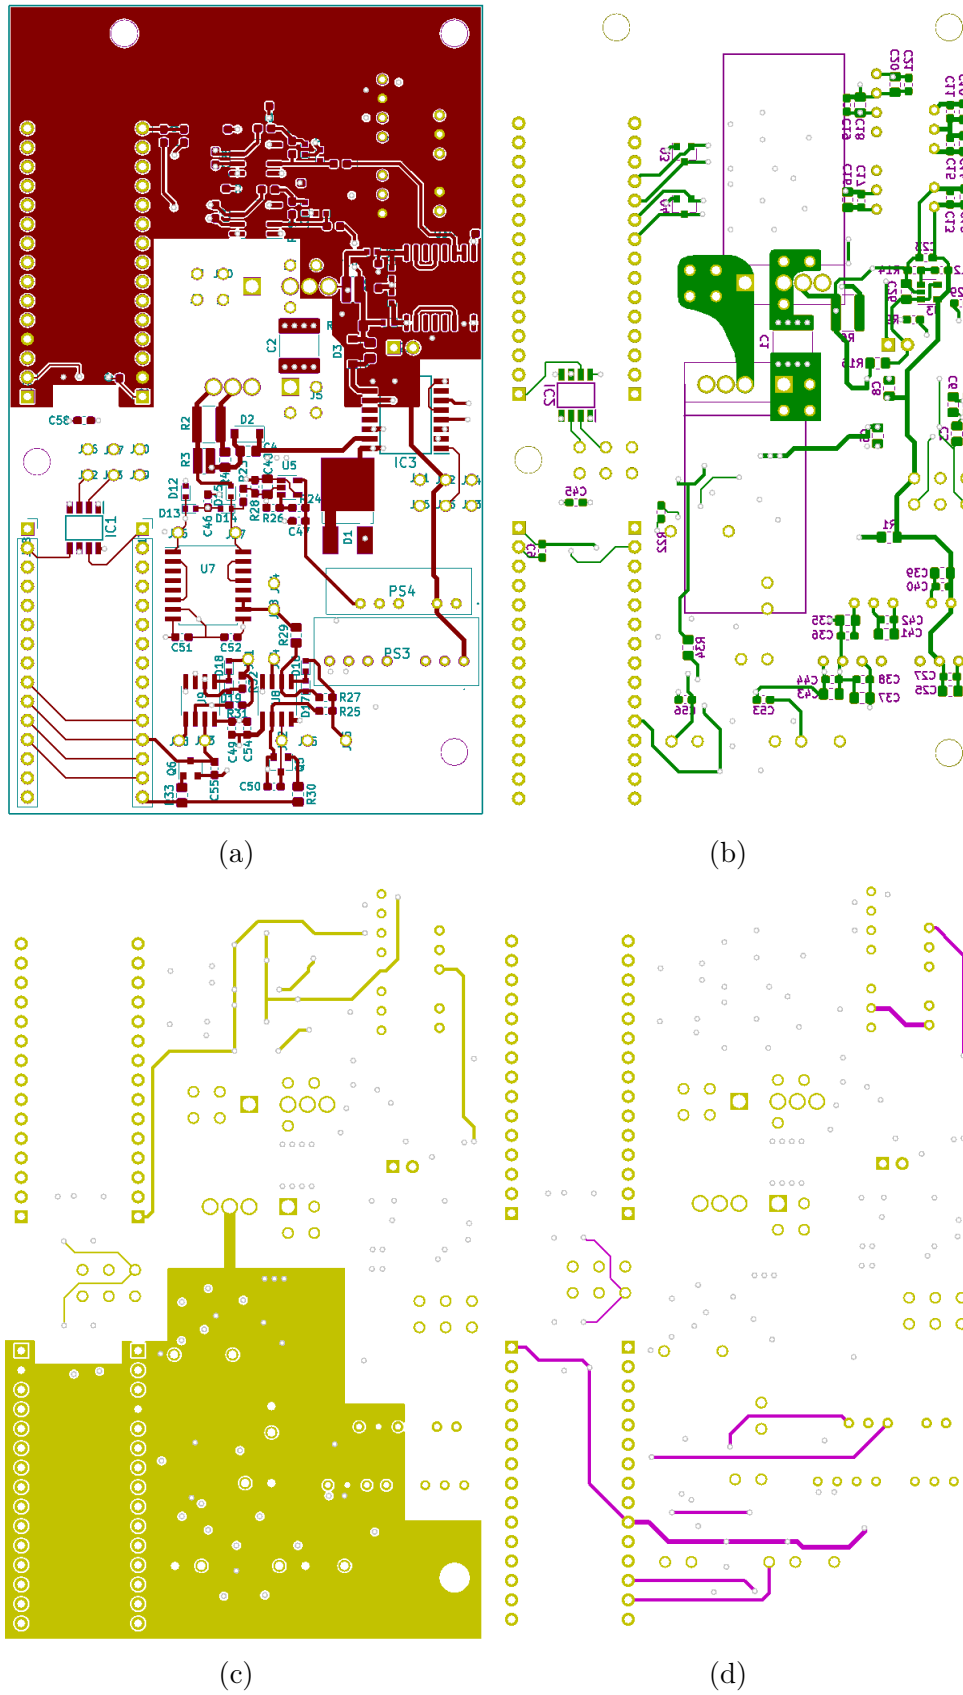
(a) Top view, (b) bottom view, (c) inner layer 1 and (d) inner layer 2 of the half-bridge module PCB with condition monitoring.
